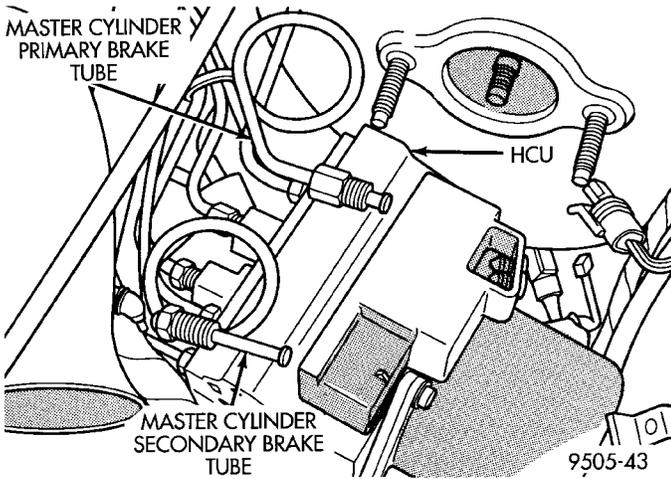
Primary And Secondary Brake Tubes From Master Cylinder To HCU
